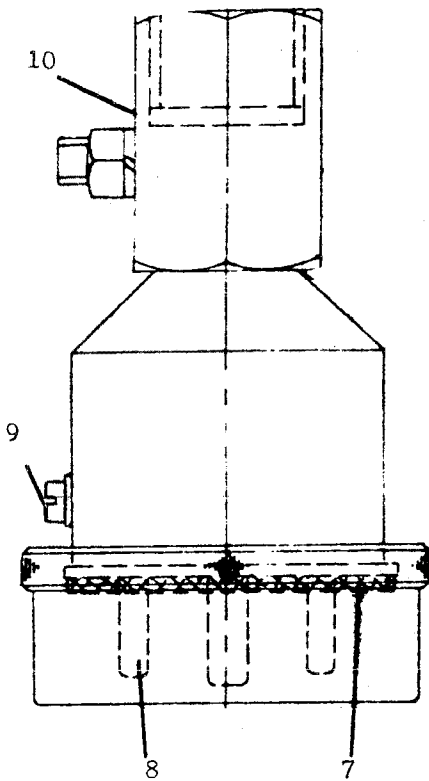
Typical Arrangement of Portable Plugs and Sockets
